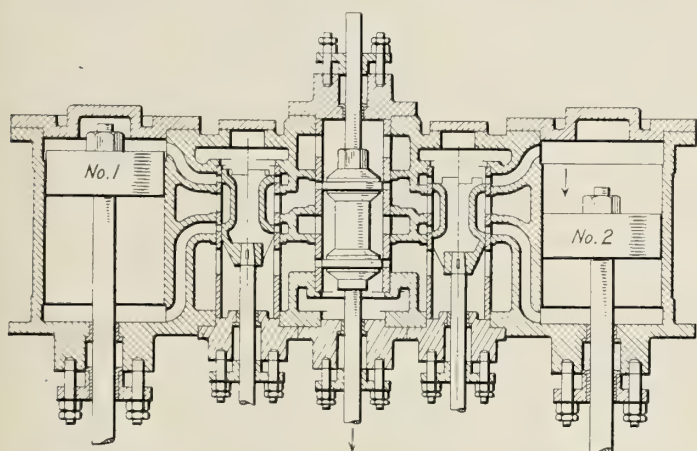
Section Through Cylinders of Vertical Steering Gear
